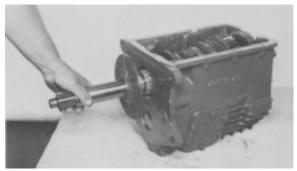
Position main drive gear bearing cap gasket on bearing cap. Install bearing cap on main drive gear. Apply a band of Loctite 262 Thread Lock to bearing capscrews. .125 [3,1mm] from end of thread .375[9,5mm] long. (Do not dip capscrews).
